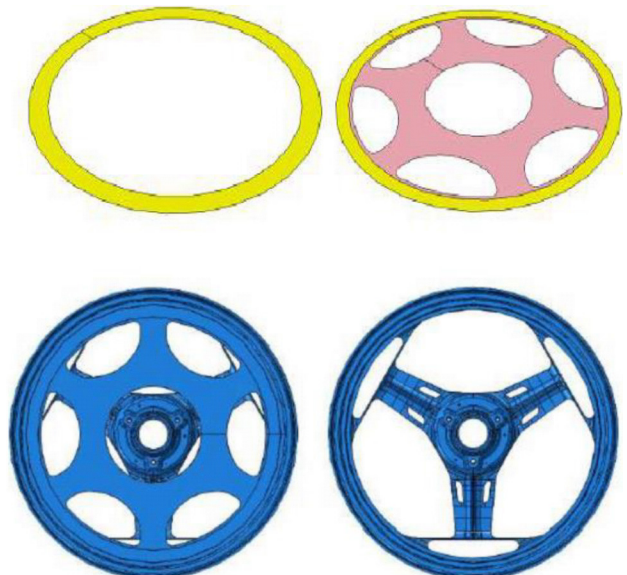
Stiffening disks (outer disk on left side and inner disk on right side). The final layout of the wheel with stiffening disks is shown on the bottom.
